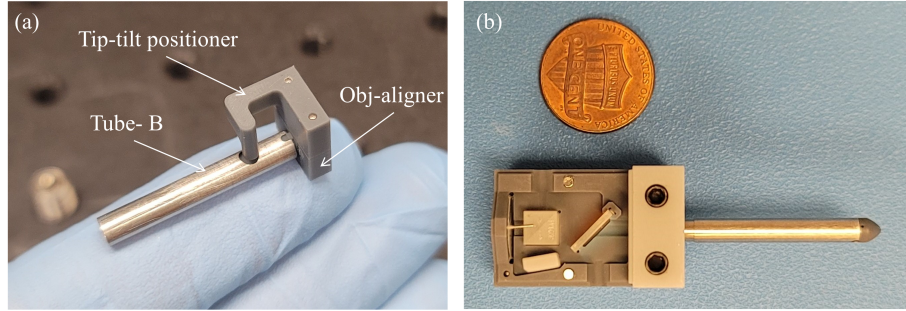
(a) 3D printed fixtures for aligning lens L_6 with tube-B, (b) Packages compact handheld instrument for two-photon imaging.
